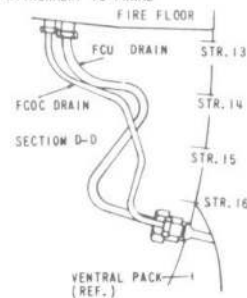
NO. 2 ENGINE BAY DRAINAGE (MK. 1A)
